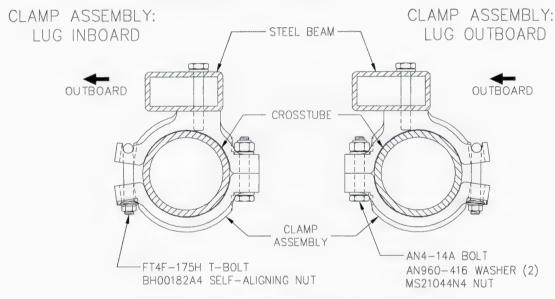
Beam Installation – Clamp Detail Lug Inboard and Lug Outboard Installations Shown
